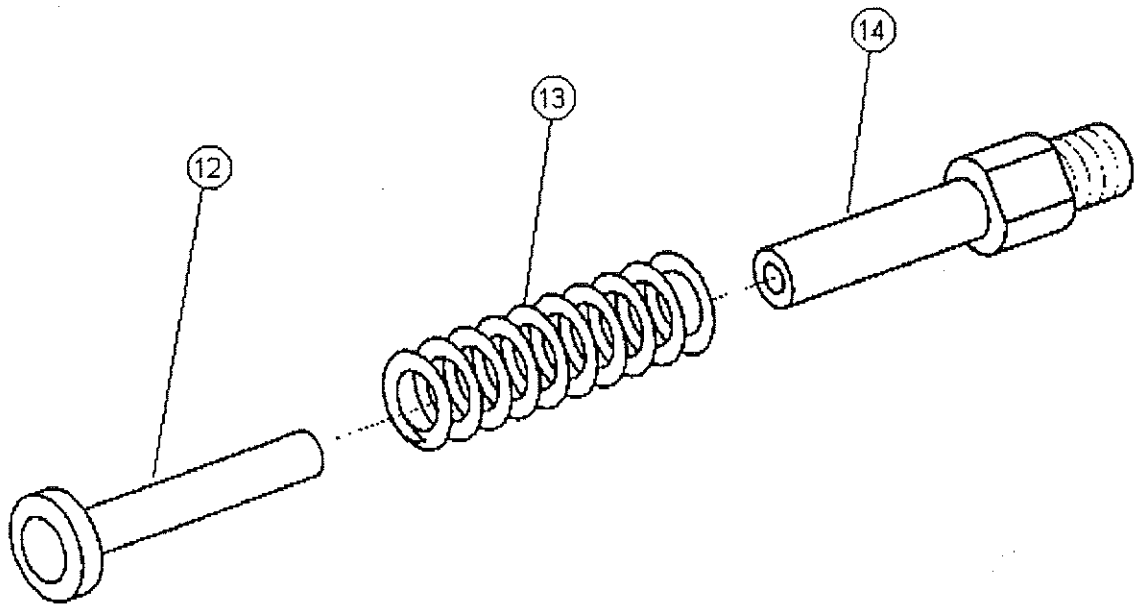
STEERING PUMP ASSEMBLY - SHEET 1 OF 4
